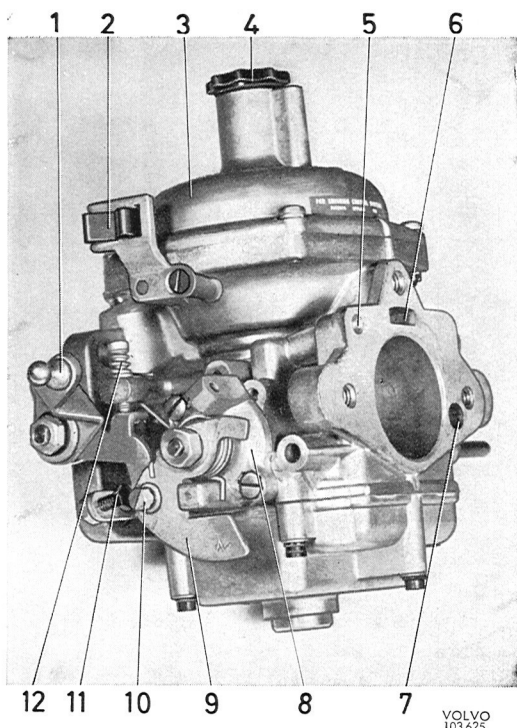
Stromberg carburetor, left side, B 20 A
